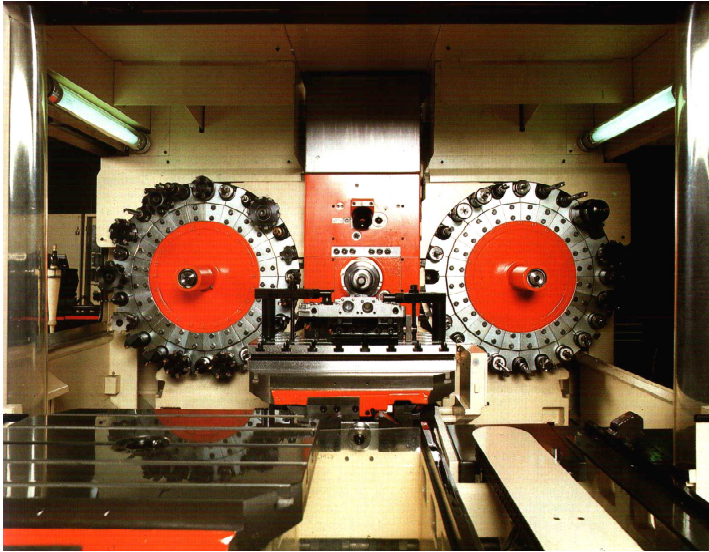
Machining centre with two disk stores and pick-up tool changing method
